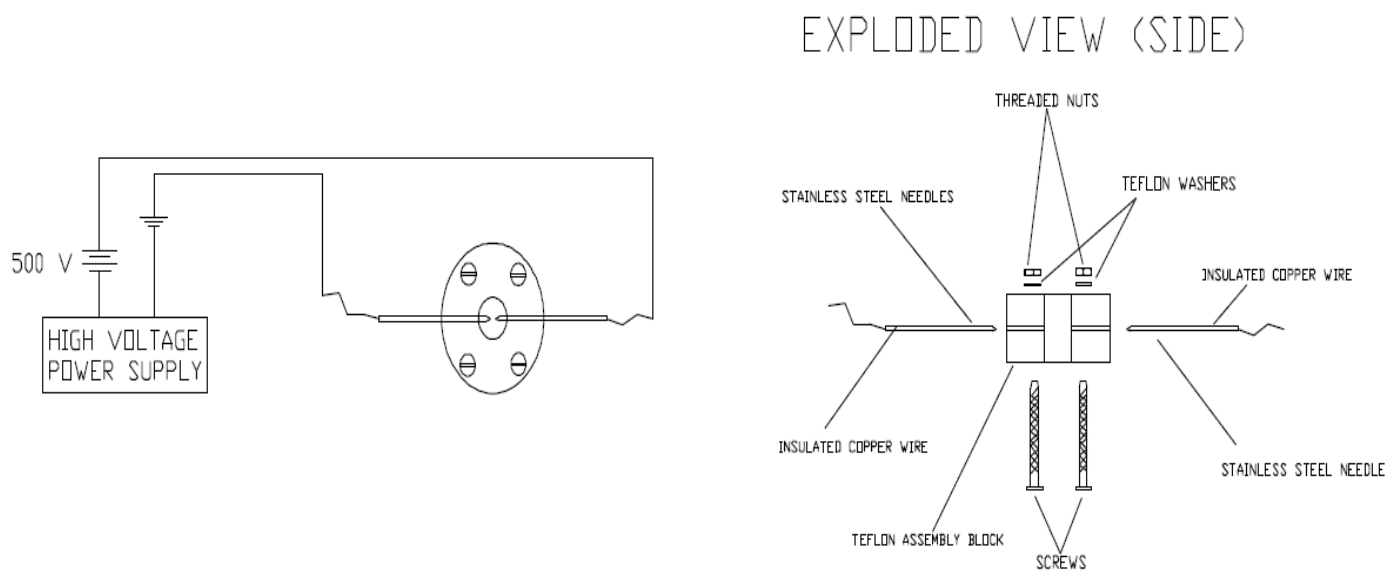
A schematic of the Needle Plasma Discharge ionization assembly used to produce carbon cluster ions. Fig a shows the assembly installed on the nozzle drive, with voltage connections. Fig b. shows the exploded form of fig a, showing all the individual parts in the assembly.
